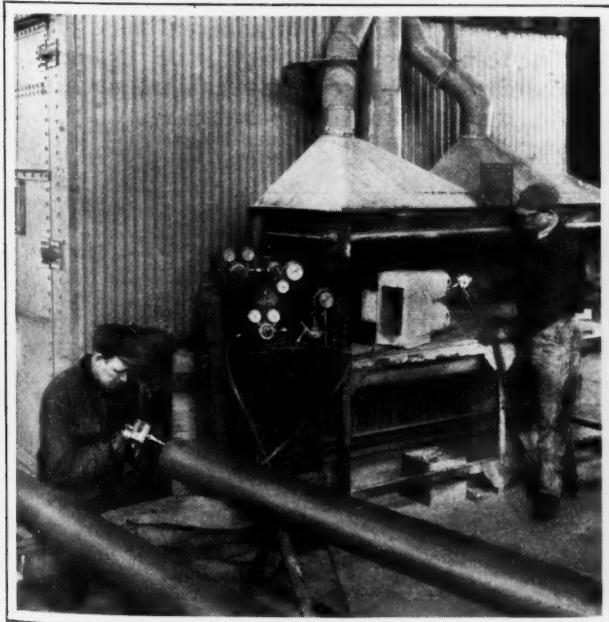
(Left) Enlarging End of Worn Shaft; (Right) Use of Stand and Exhaust Hood for Coating Parts which are Brought to the Spraying Tool
